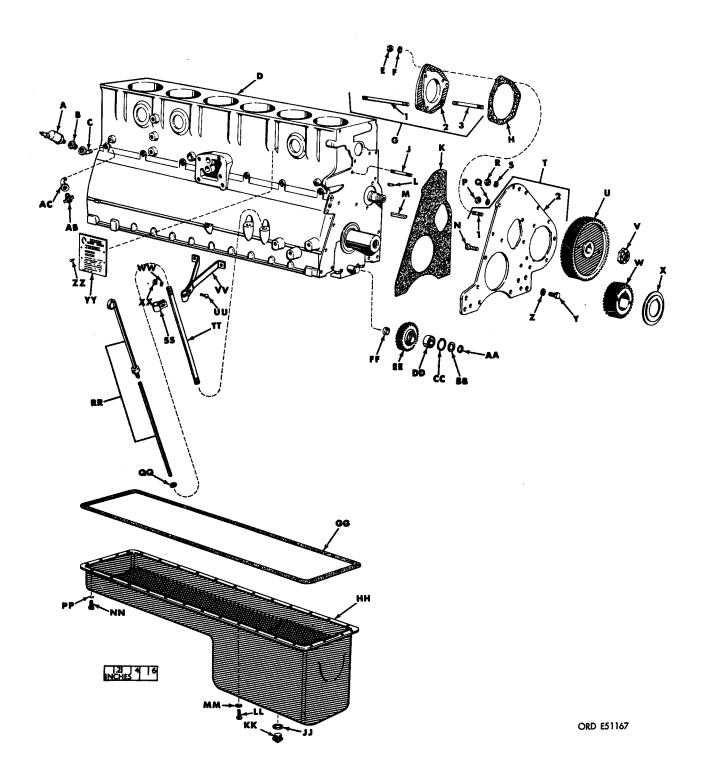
CYLINDER AND CRANKCASE, TIMING GEARS, OIL PAN, AND RELATED PARTS - EXPLODED VIEW.
